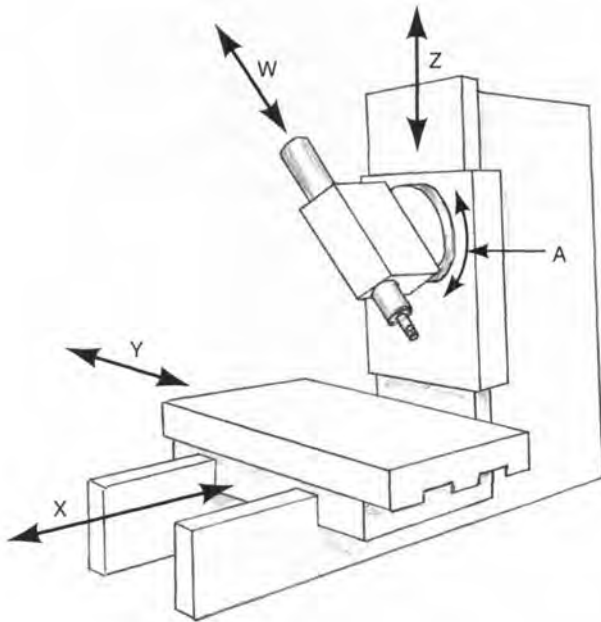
U A representation of the machine motions of a 5-axis milling machine.
